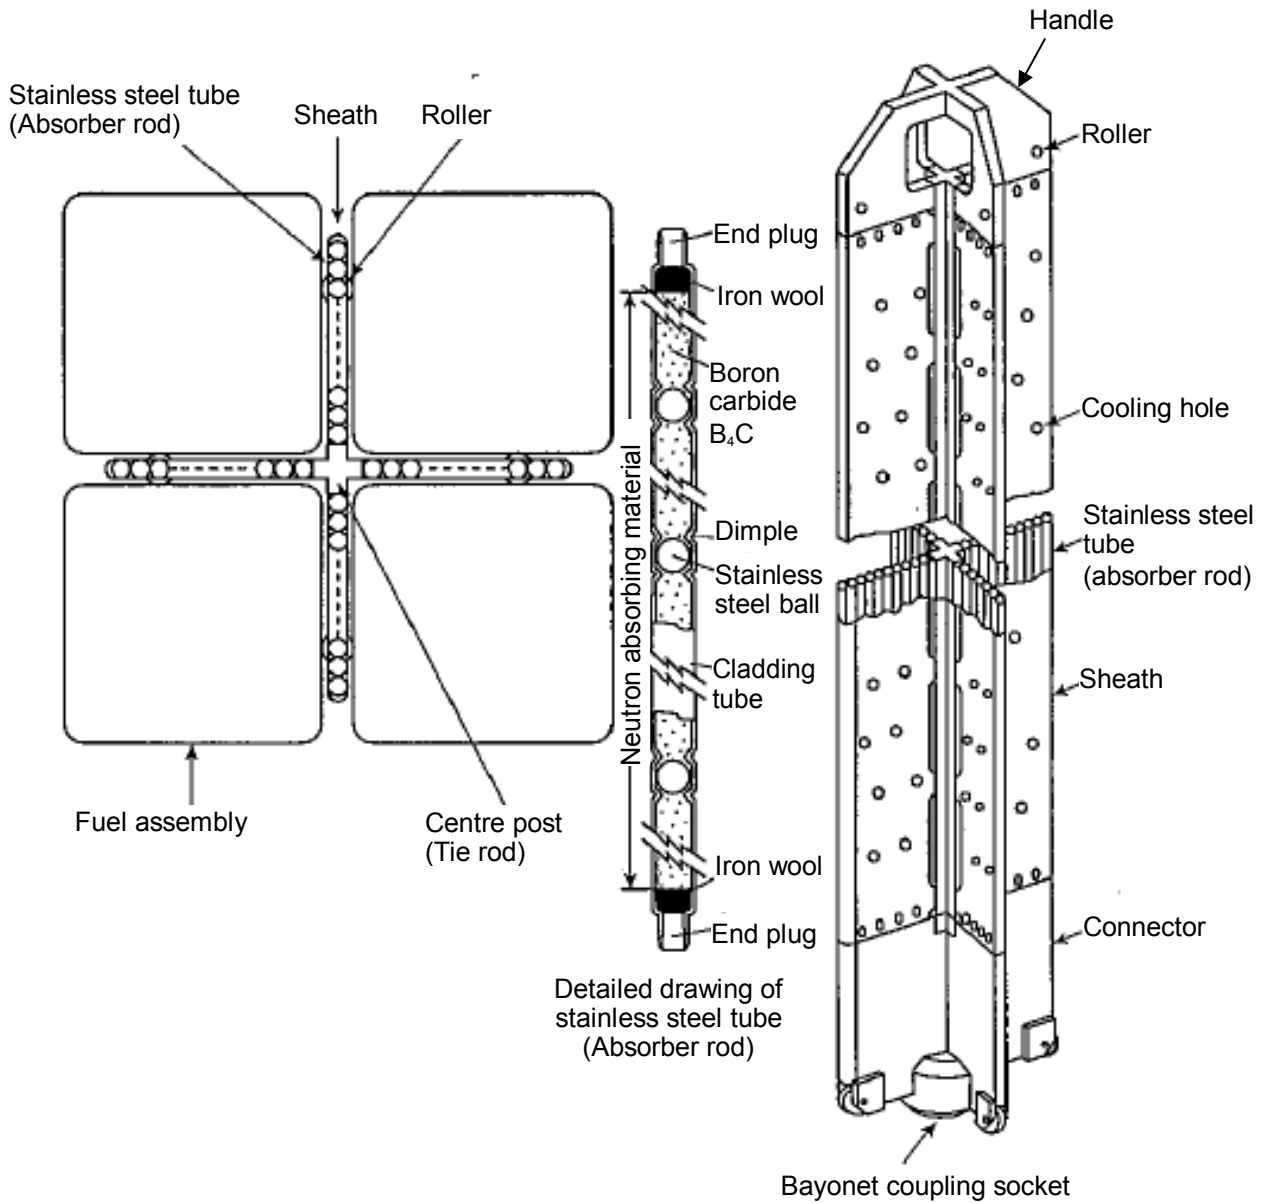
Control Rod (Boron Carbide Type)
